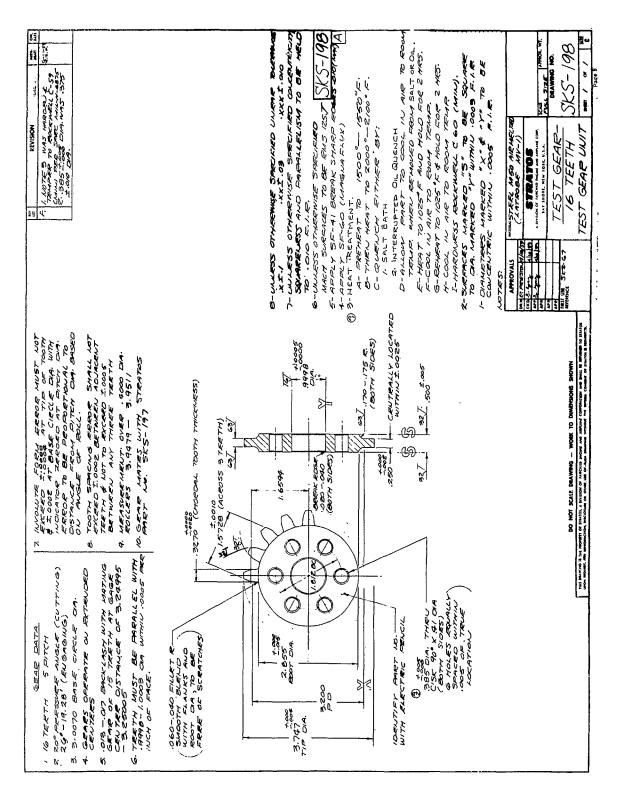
M-50 Tool Steel Gear With 16 Teeth (5 Diametral Pitch)
